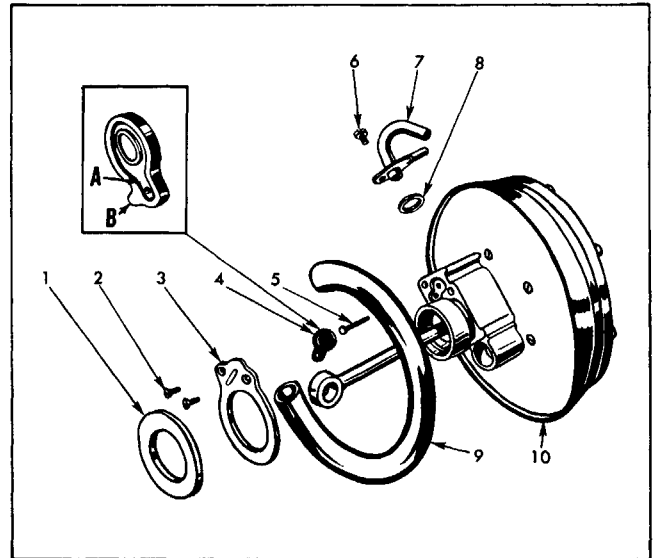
Removal or Replacement of Piston Stop, Compensating Stem, and Vacuum Hose
